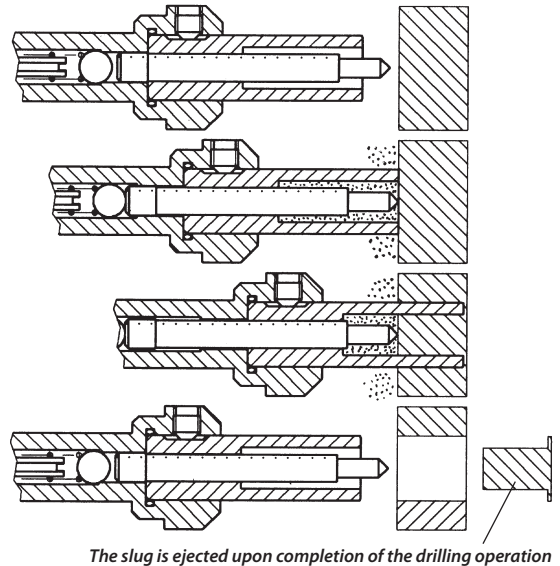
COOLANT DRILLING WITH BROACH CUTTER
